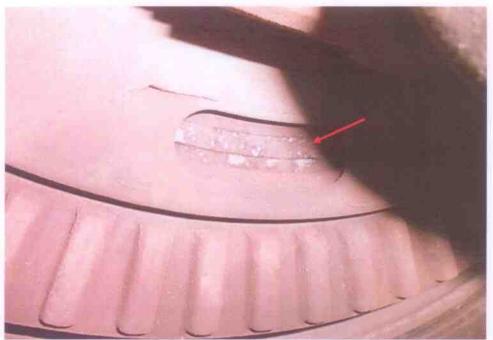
shows the brake shoes (brake pads) at the rear right wheel of the Prime Mover. The brake shoes (brake pads) of the Prime Mover were all found to be in serviceable condition with sufficient frictional material for operational purposes.
